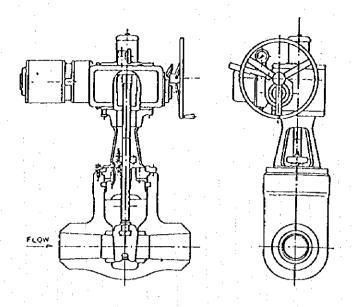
OUTLINE OF WELDED AND MOTOR DRIVEN TYPE GATE VALVE
